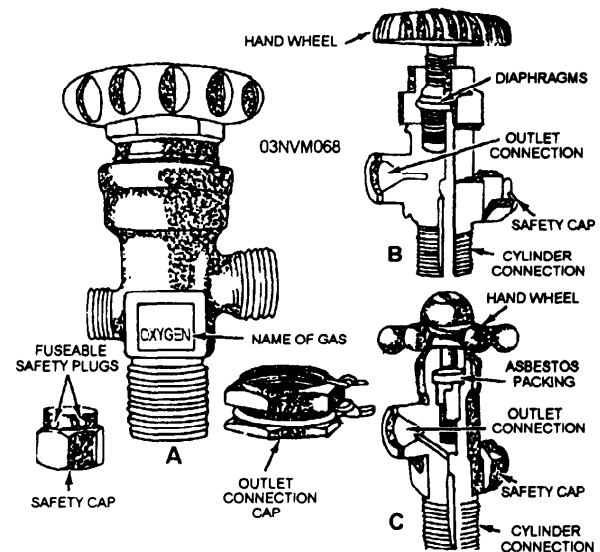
Oxygen cylinder gas valves: (A) external view of one type of valve, with related safety and outlet connection caps; (B) cutaway view of the same valve, showing diaphragms to prevent gas leakage when the valve is opened; (C) cutaway view of another type of valve, with asbestos packing to prevent gas leakage when the valve is opened.
